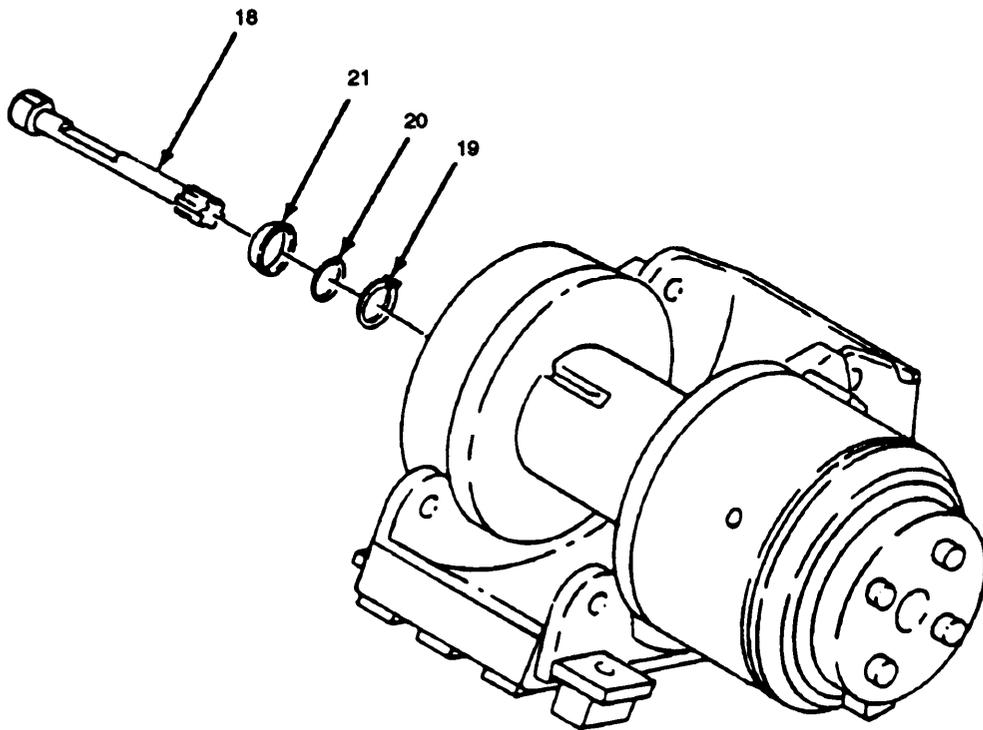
Winch Assembly Model 11-S-EC, Reassembly (Sheet 8 of 10).
